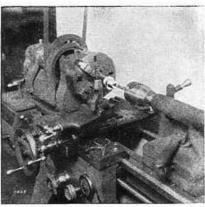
Making a Bushing in the Chuck of a 9-inch Lathe
